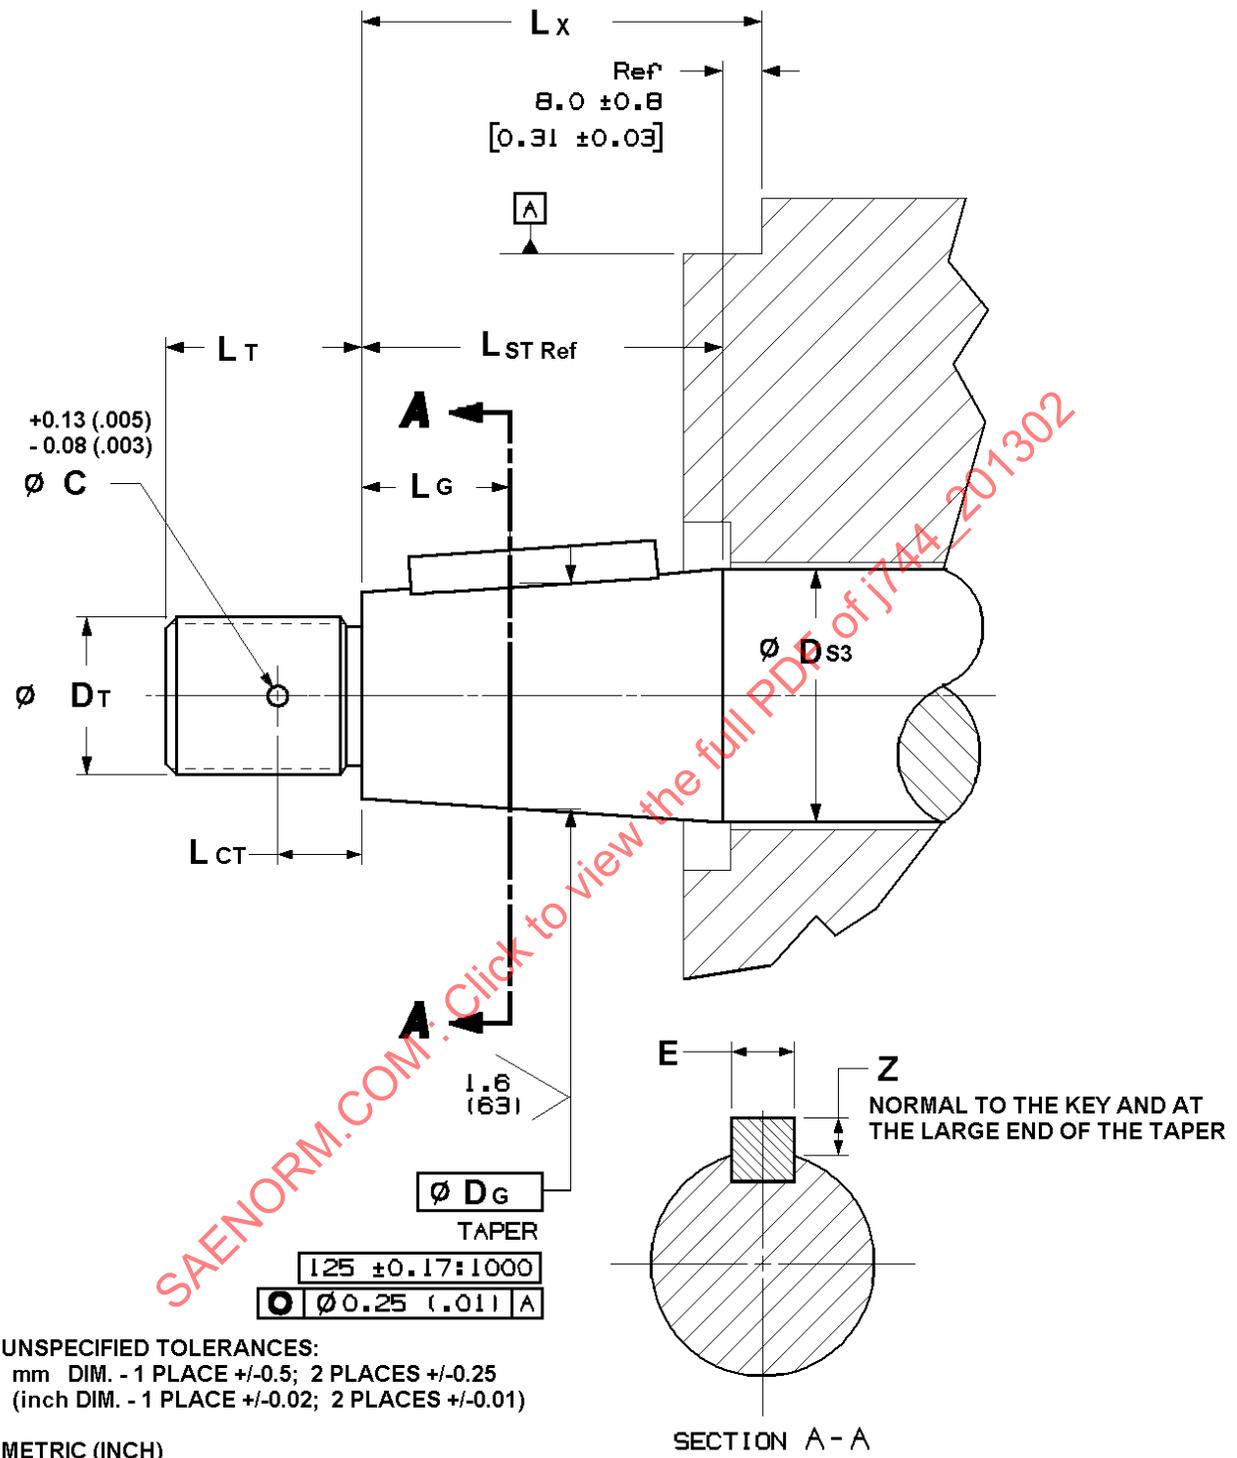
DIMENSIONS OF TAPER SHAFT ENDS WITH THREAD - 3
